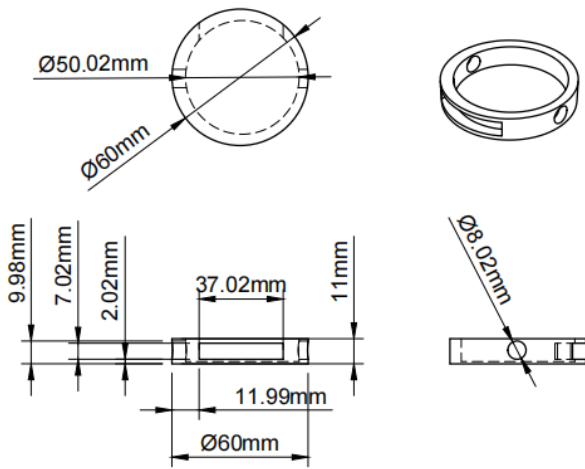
Pin-lock system cover design using AutoCAD Tinker CAD (Autodesk, Inc., USA).
